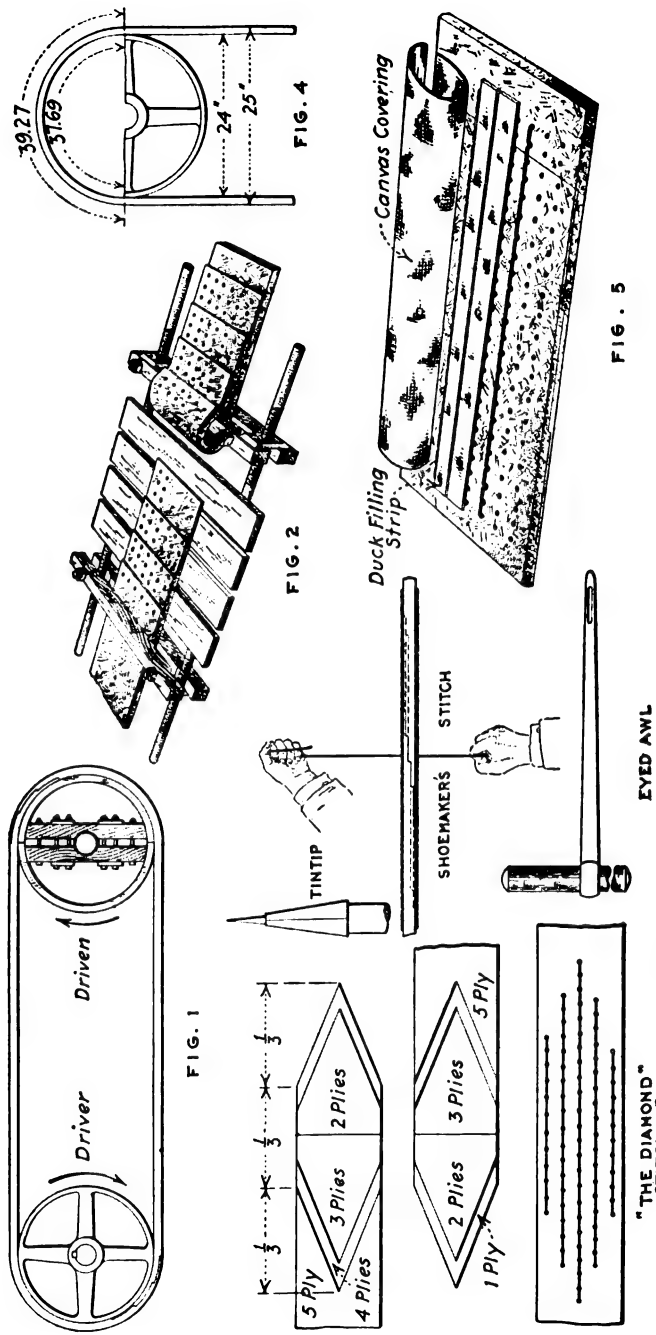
STITCHING, SPLICES AND TOOLS USED IN REPAIRING RUBBER BELTS.
